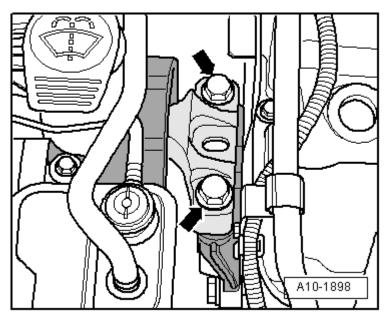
Identifying Engine Mount To Engine Mount Bracket Bolts Courtesy of AUDI OF AMERICA, LLC
